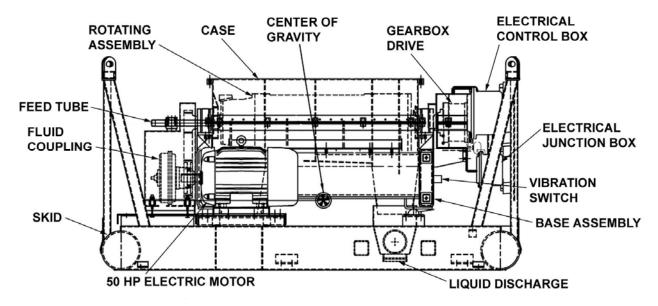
Gearbox Drive (GBD) Centrifuge Major Components Location
